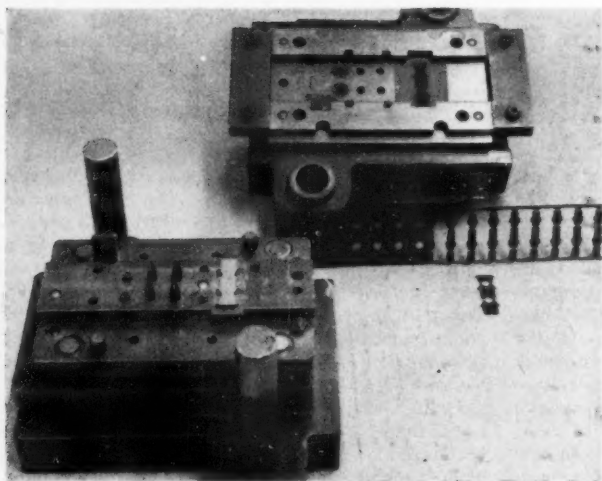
This press tool is used for blanking anodes from nickel iron strip and incorporates tungsten carbide punches and dies produced by spark-erosion. The tool will blank a complete batch before it requires to be re-serviced
